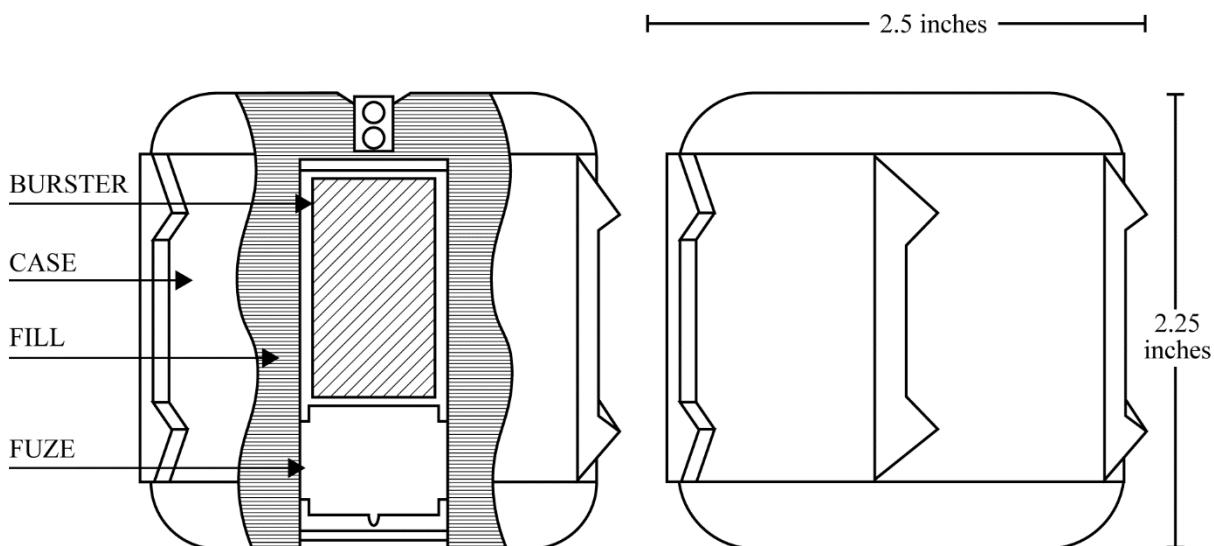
Bomblet, 2.5-inches, E139 - Line Drawing
